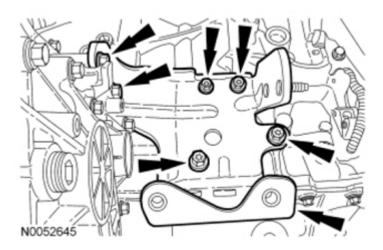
Locating Catalytic Converter Bracket Bolts Courtesy of FORD MOTOR CO.
